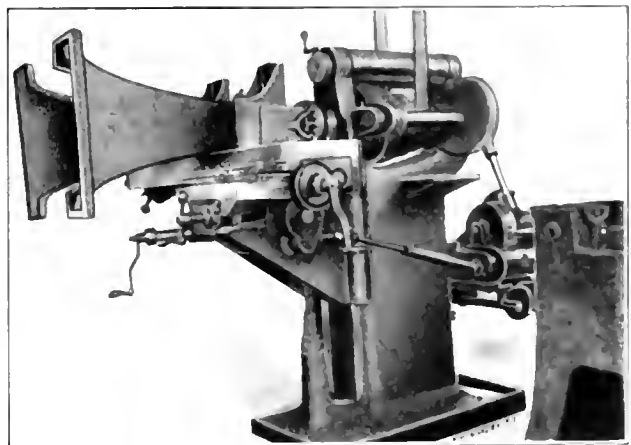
Floor Grinder Base strapped on Milling Machine.
